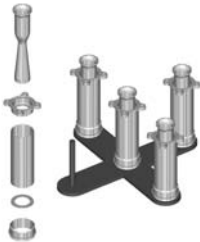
Braze Fixtures to Hold parts in Location During Brazing
